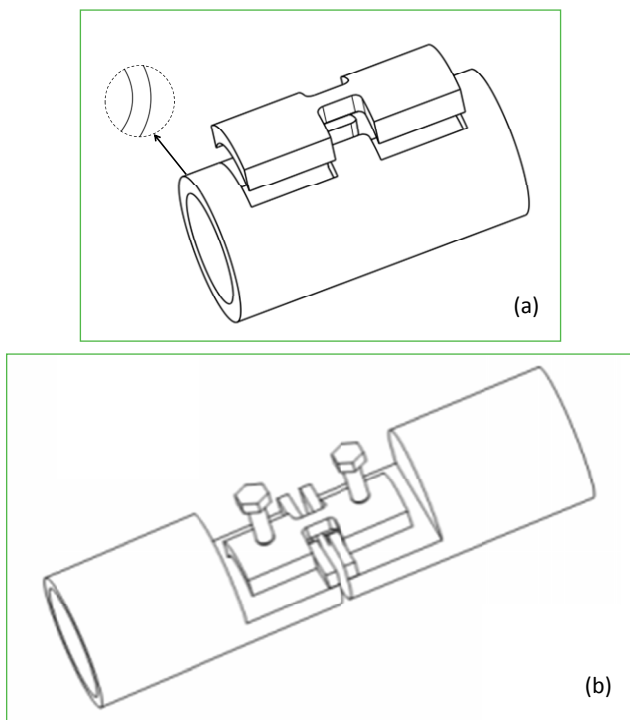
(a) Tensile test sample, microhardness and OM test positions and (b) clamping device for RT and hot tensile testing
